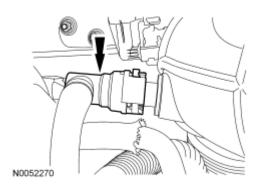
Locating Engine Breather Courtesy of FORD MOTOR CO.
